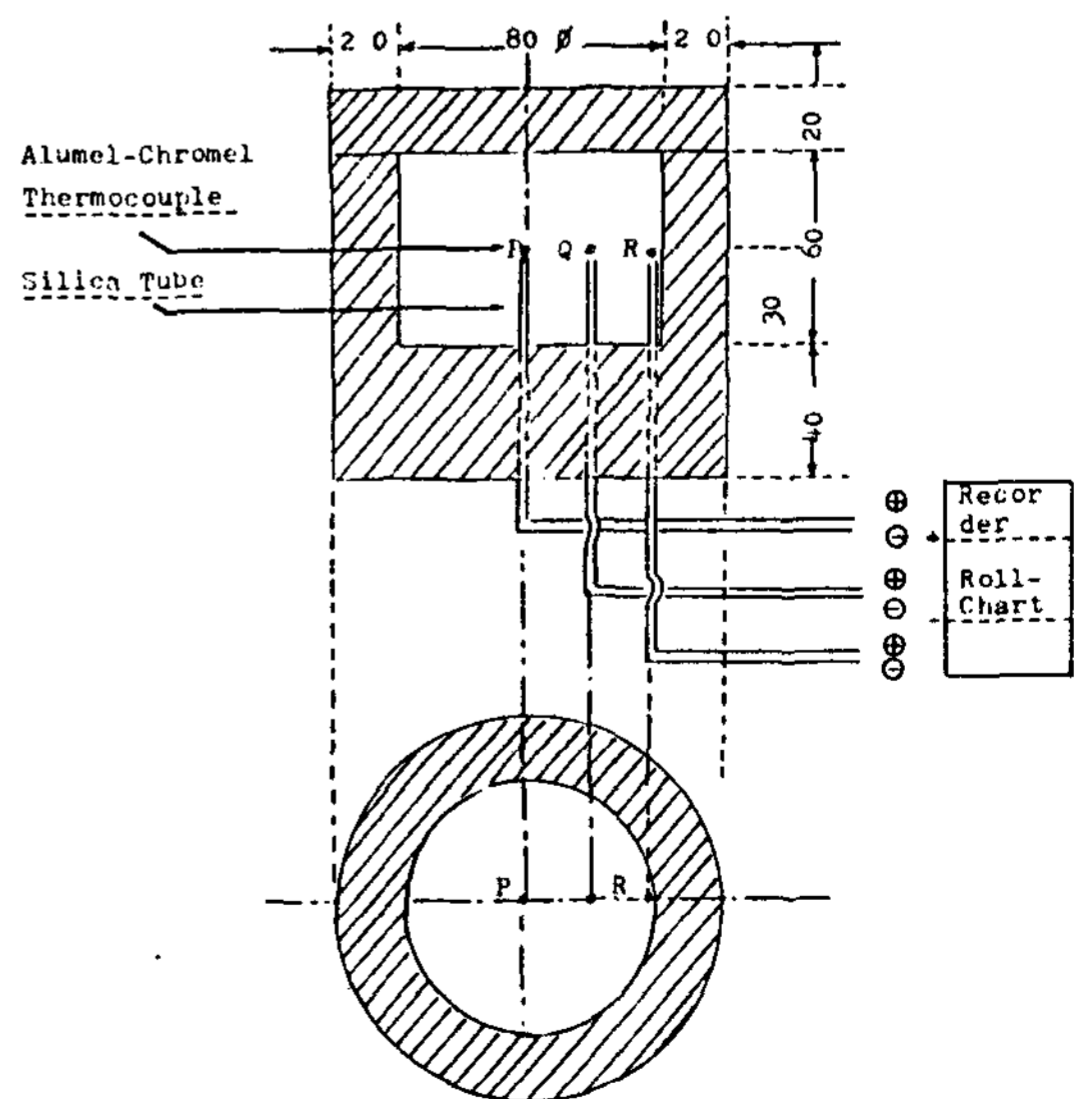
Shape and dimension of the Mold, and the position of thermocouple.
